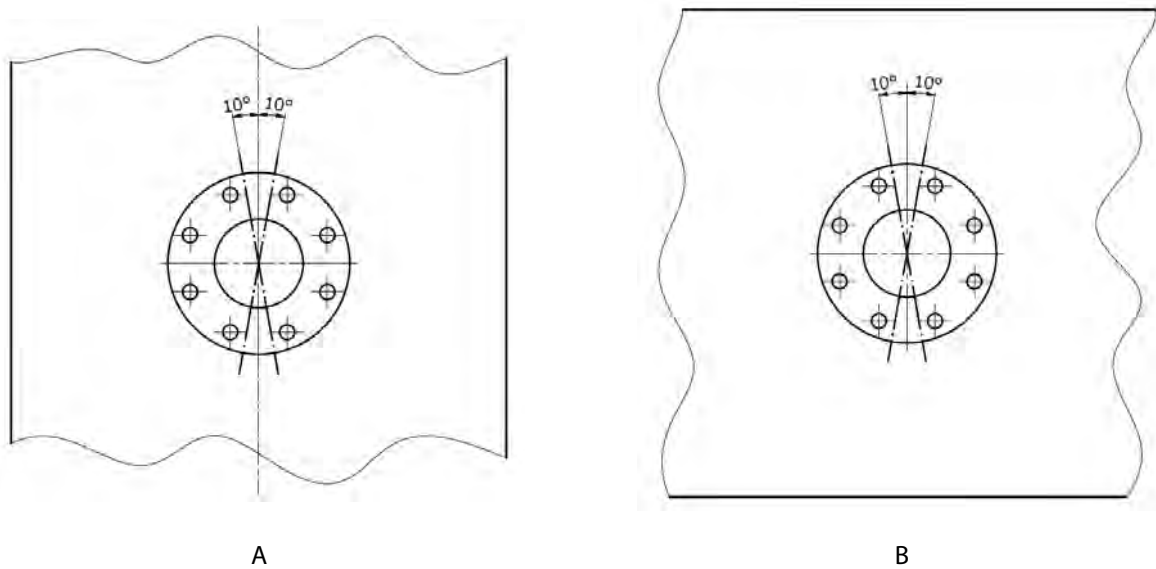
Positioning Tolerance of the Flange in Different Exhaust Pipe Installations
